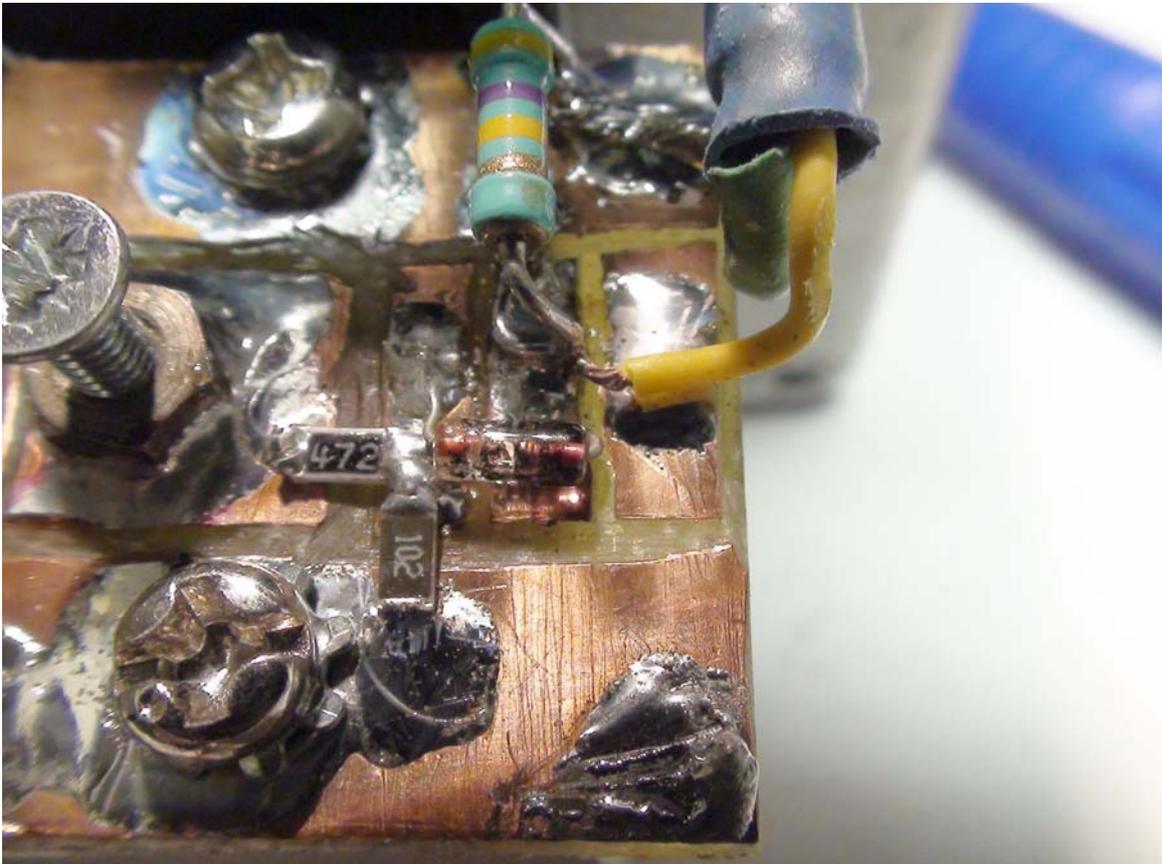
Sampling PCB showing the smd resistors and diode. Tracks were cut with a Dremel disc.
